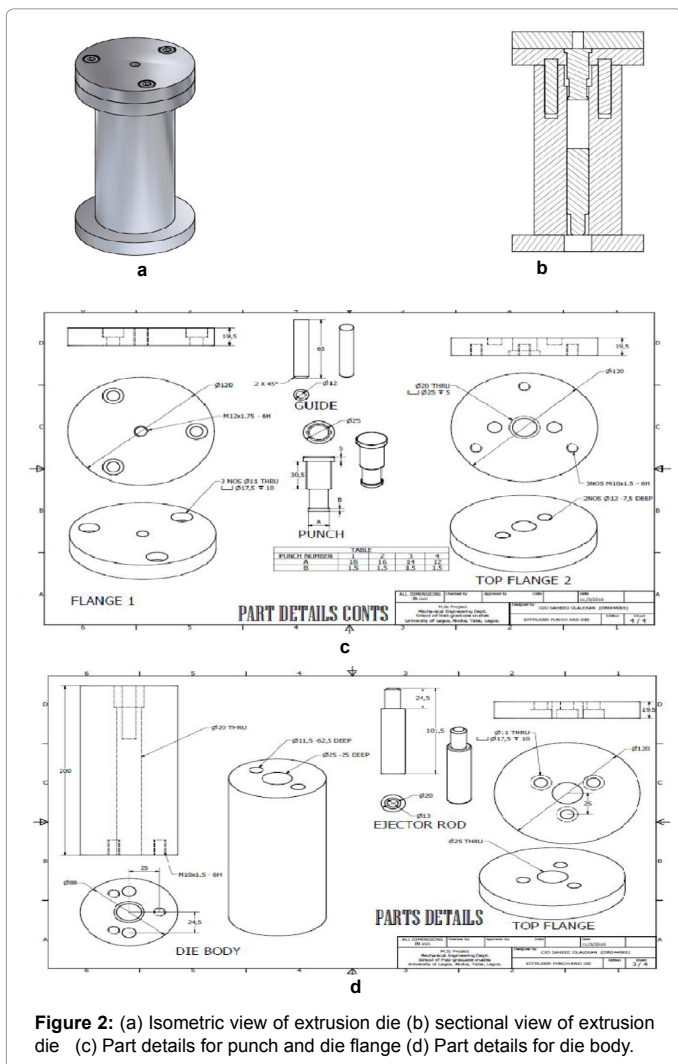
(a) Isometric view of extrusion die (b) sectional view of extrusion die (c) Part details for punch and die flange (d) Part details for die body.
